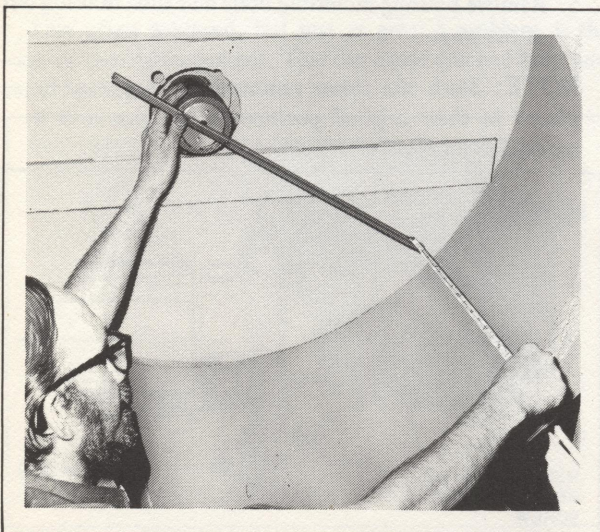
MAKING SWEEP TOOL MEASUREMENT.
